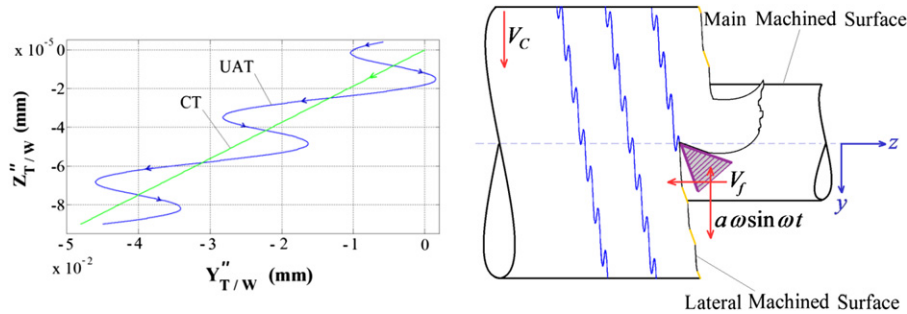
The position of cutting tool edge relative to workpiece ( $V_f=0.4$  mm/rev,  $V_c=0.36$  m/s).
